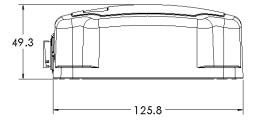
IDP-680 and IDP-690 Top View Enclosure Dimensions (mm)
